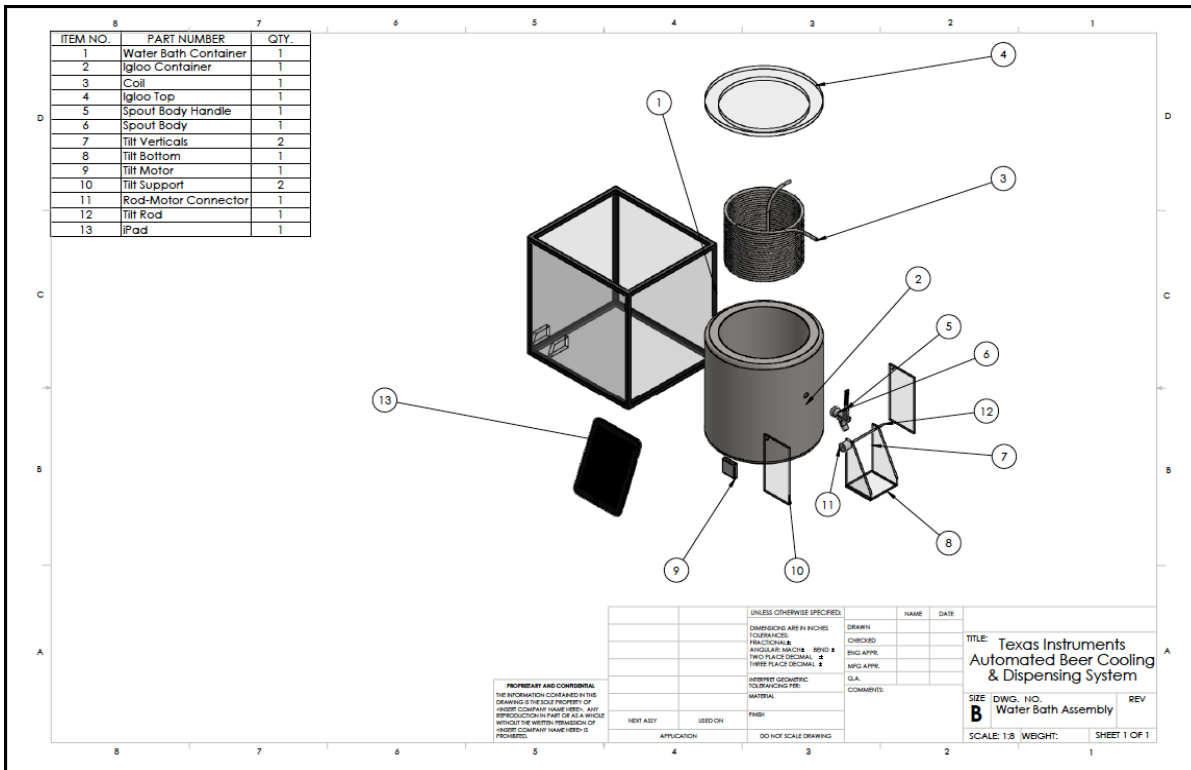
SolidWorks Drawing of Water Bath and Tilting Mechanism Assembly
